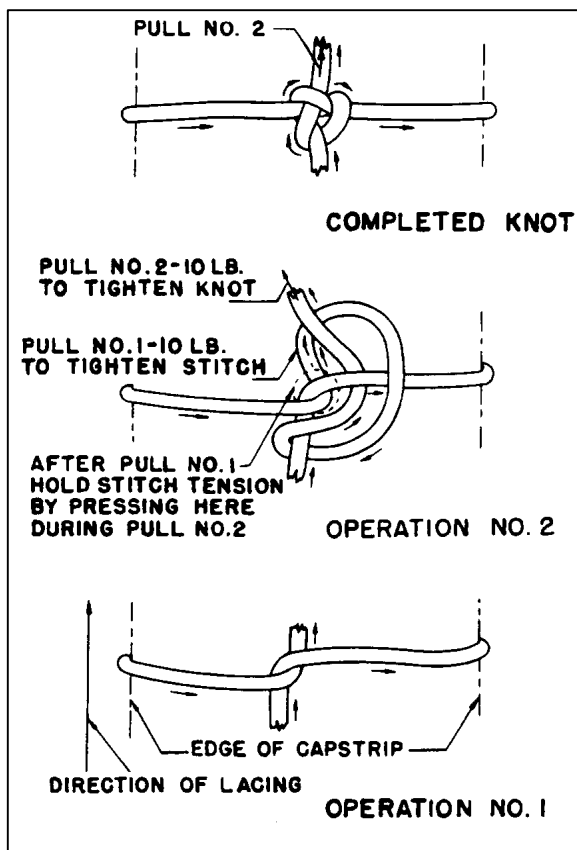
Standard external modified seine knot used for single and double rib lacing.
